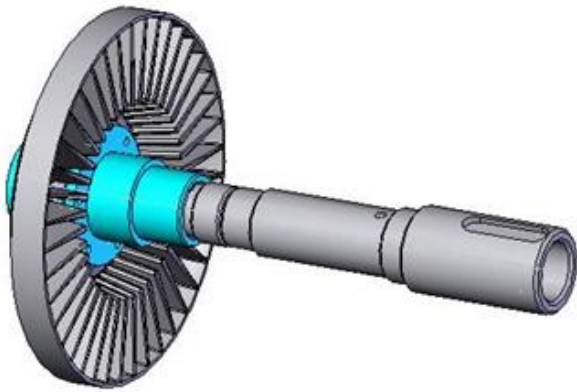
The turbine shaft – main shaft subassembly with the turbine wheel.
